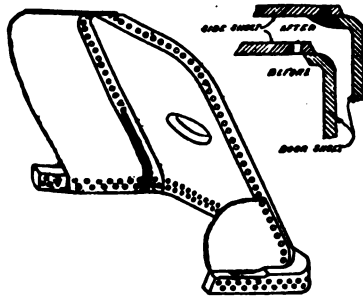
METHOD OF WELDING DEFECTIVE SEAMS.
